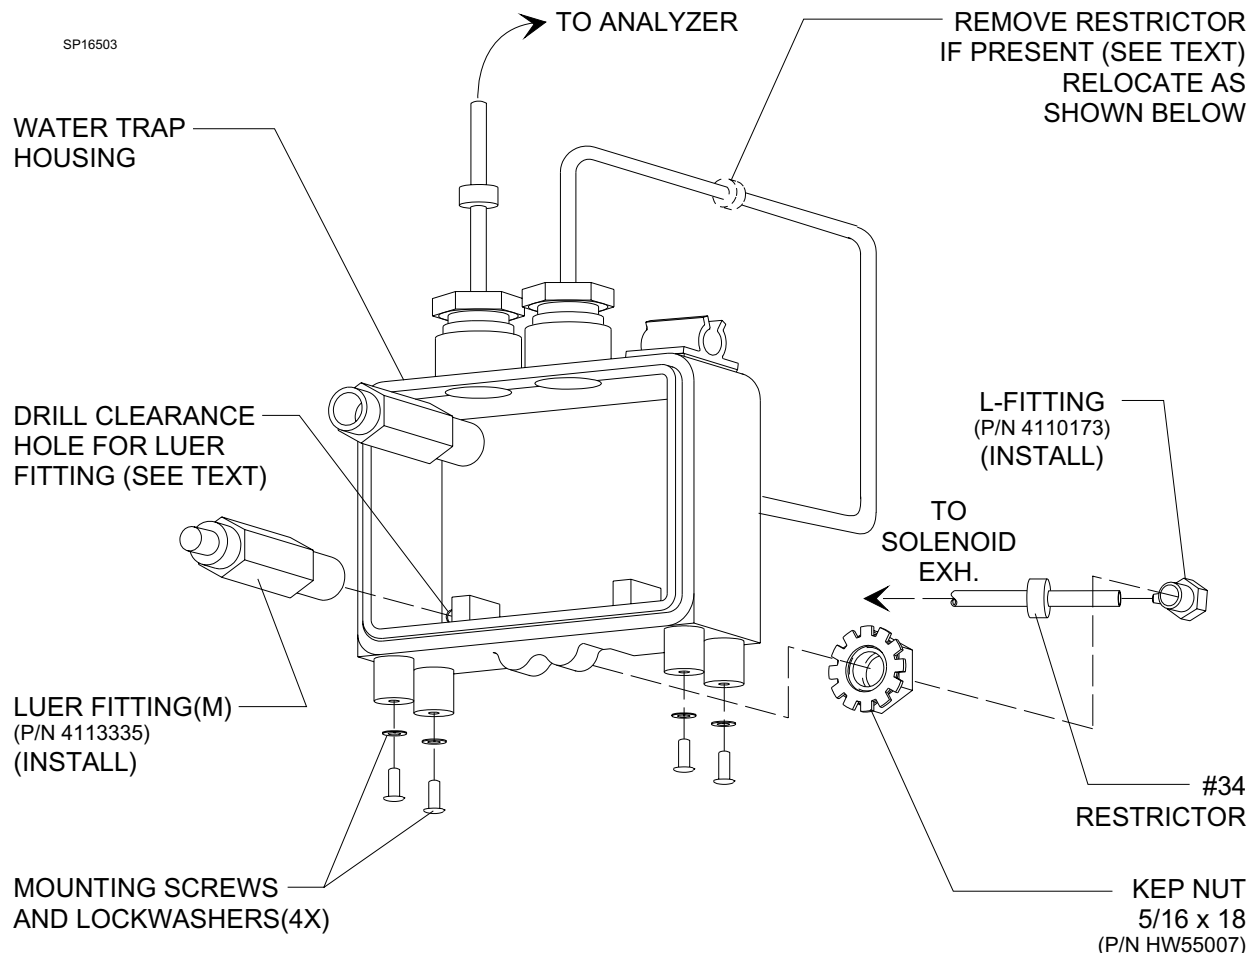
NARKOMED 4 WATER TRAP HOUSING ASSEMBLY DETAILS
